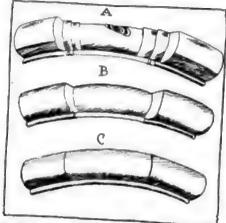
STEPS IN SECTIONAL REPAIR OF CASING
